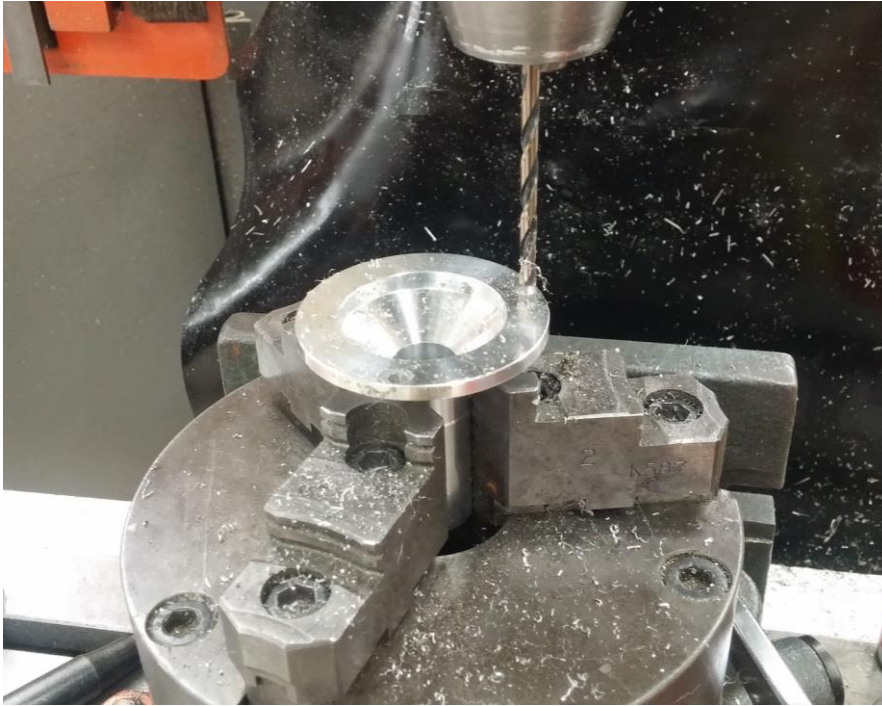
A rotary table with a three jaw chuck used to fixture the two halves for drilling.
